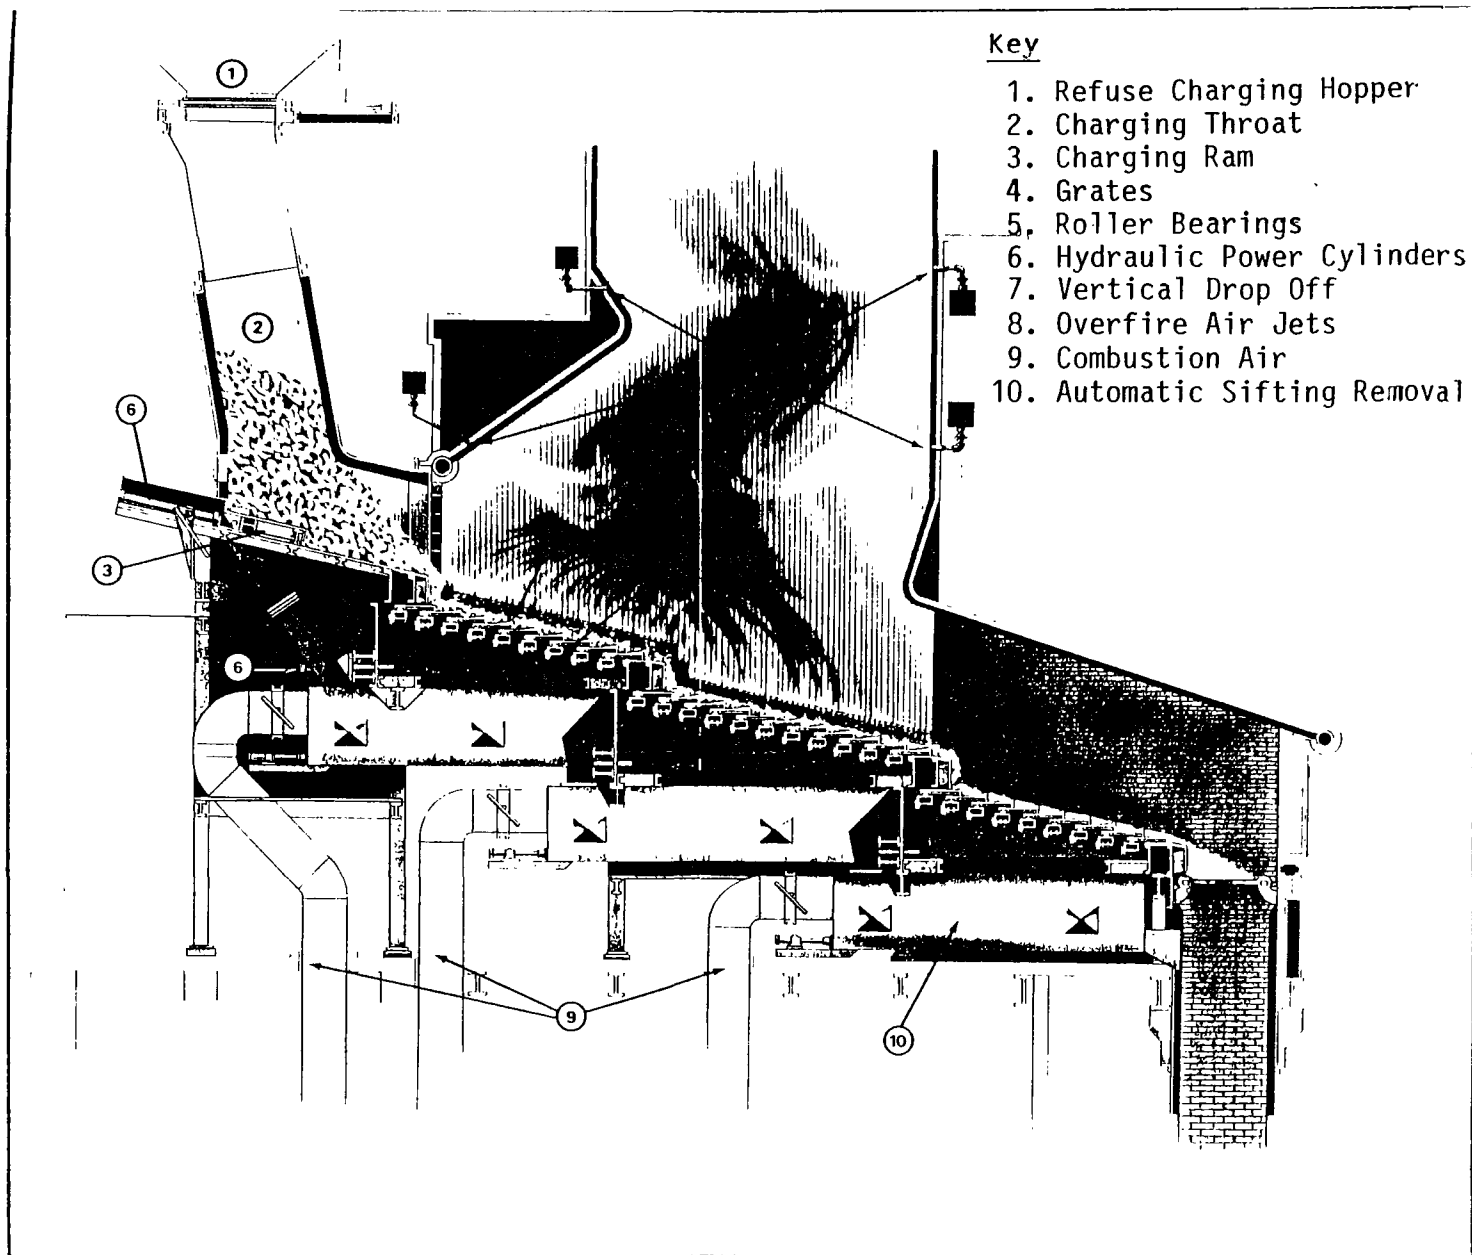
Cross-section of boiler with current design Detroit Stoker firing system.
